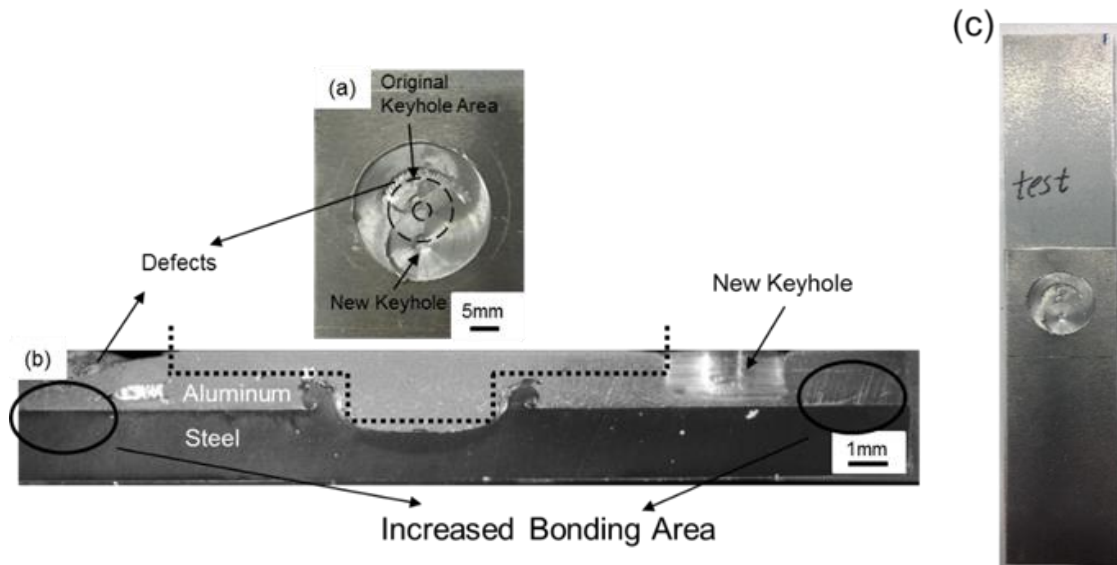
Macroscopic view of the keyhole refilled FSSW (a) Top view (b) Cross section view (c) Welded sample before the tensile test
